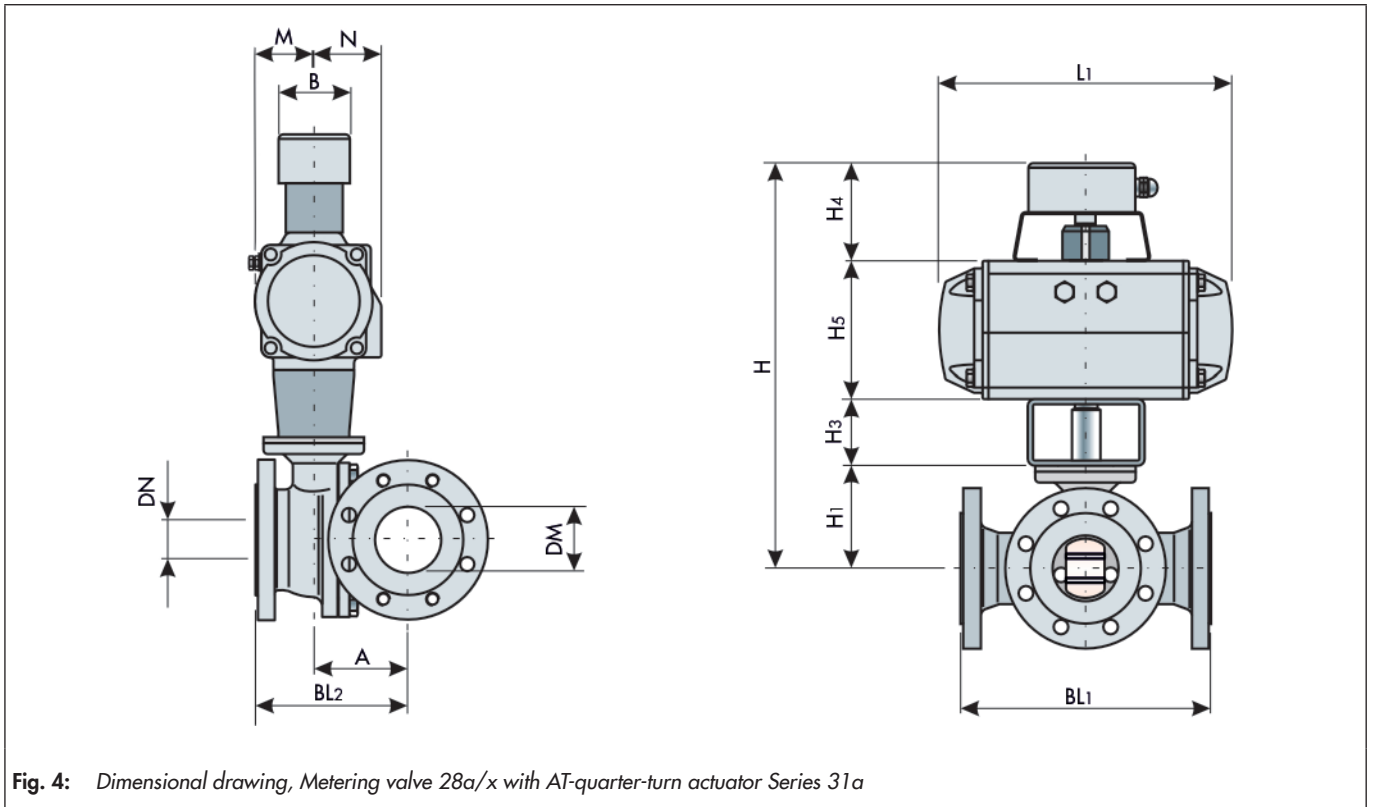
Dimensional drawing, Metering valve 28a/x with AT-quarter-turn actuator Series 31a
